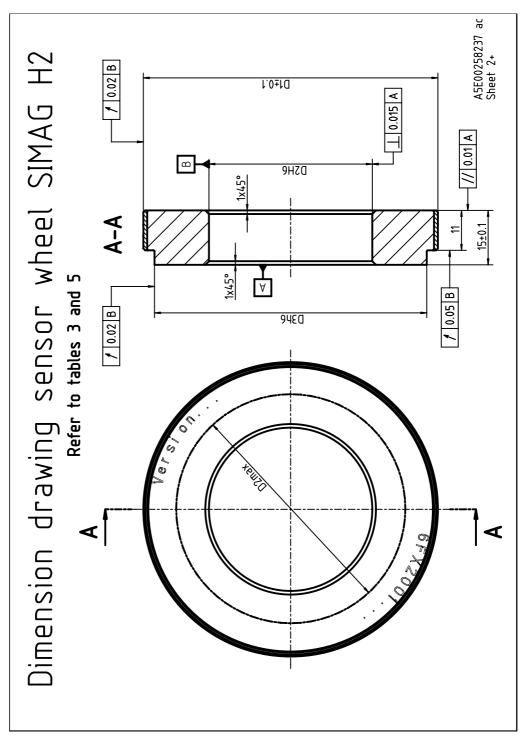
SIMAG H2 dimension drawing, measuring wheel
